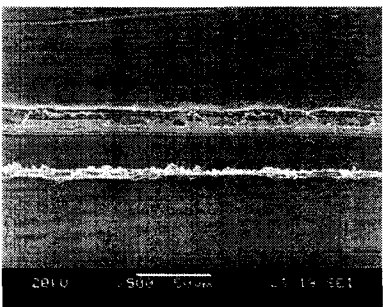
Groove machined with a rectangular tool: 6000 rpm, 5 μm feed, and 10 μm depth of cut
